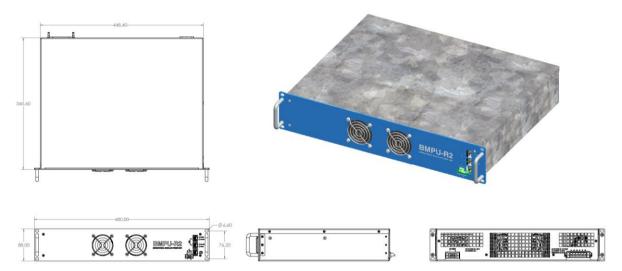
BMPU-R2 assembly drawing (with default real panel support)
